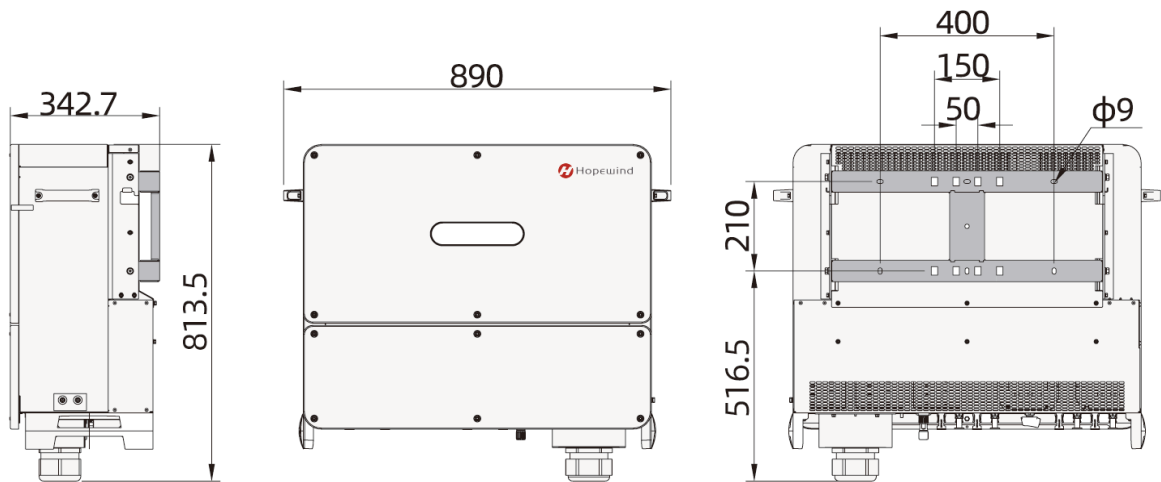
Dimensions of the inverter (unit: mm; dimension error: ± 10 mm)
